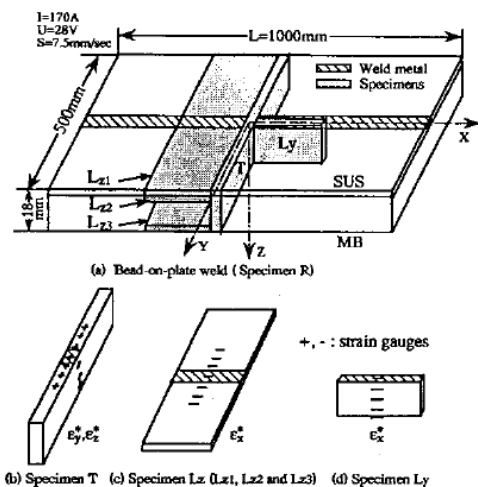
Bead-on-plate weld and specimens for residual stress measurement
